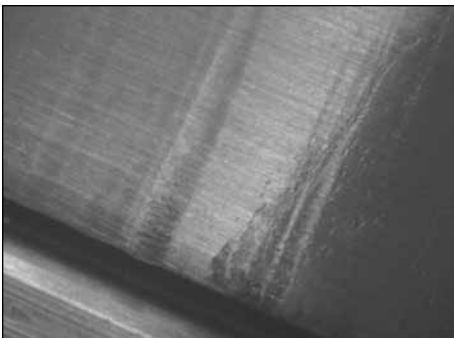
This inner ring of a spherical roller bearing shows roller impact damage from shock loading.
